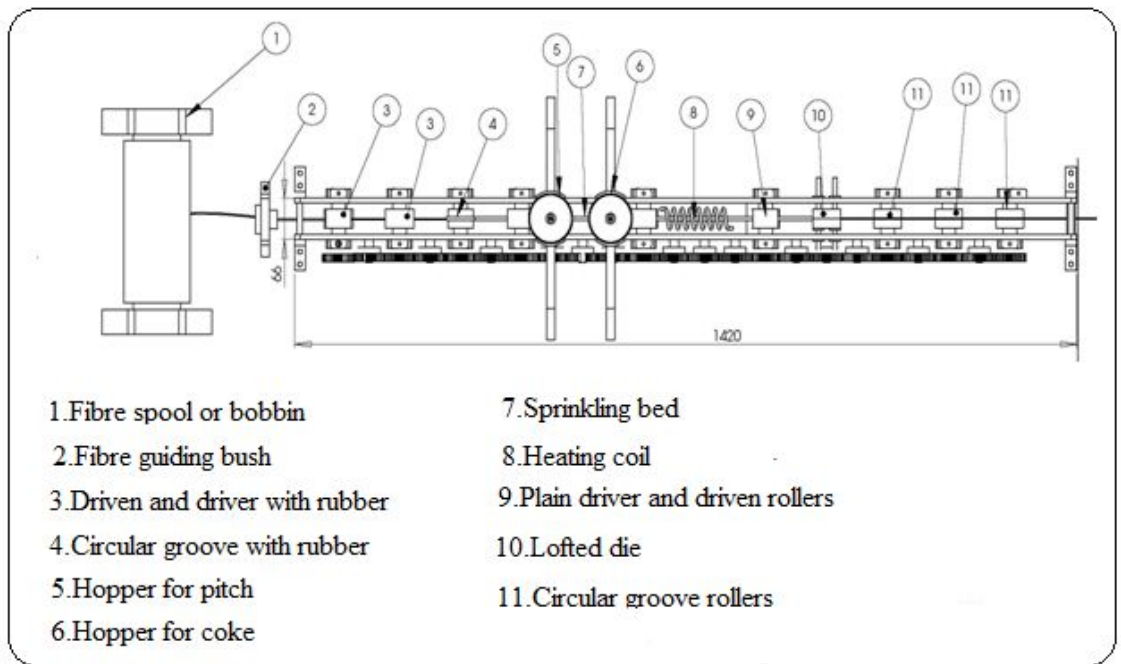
(a) Top view describing the first stage of operation of the machine
